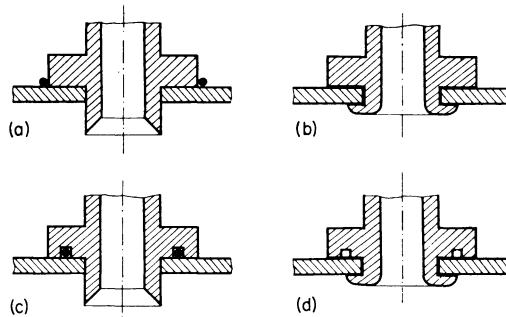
Joining methods of flanges by swagging and brazing: (a, c) before; (b, d) after completing the joint
